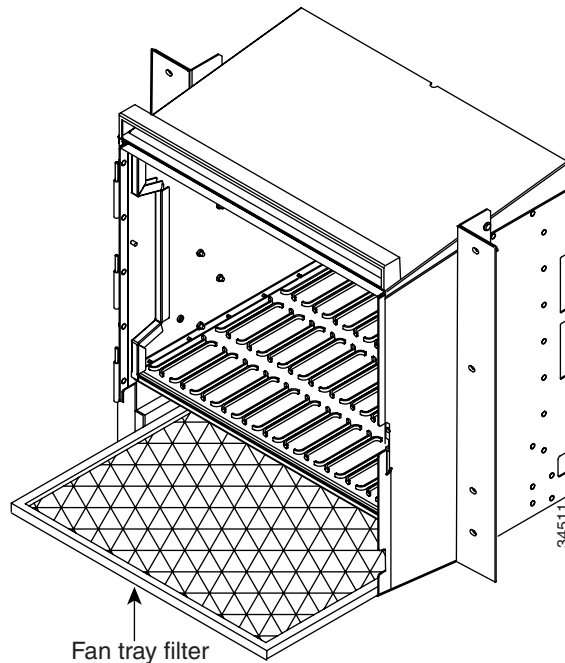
Inserting or removing the fan-tray assembly (front door removed)
